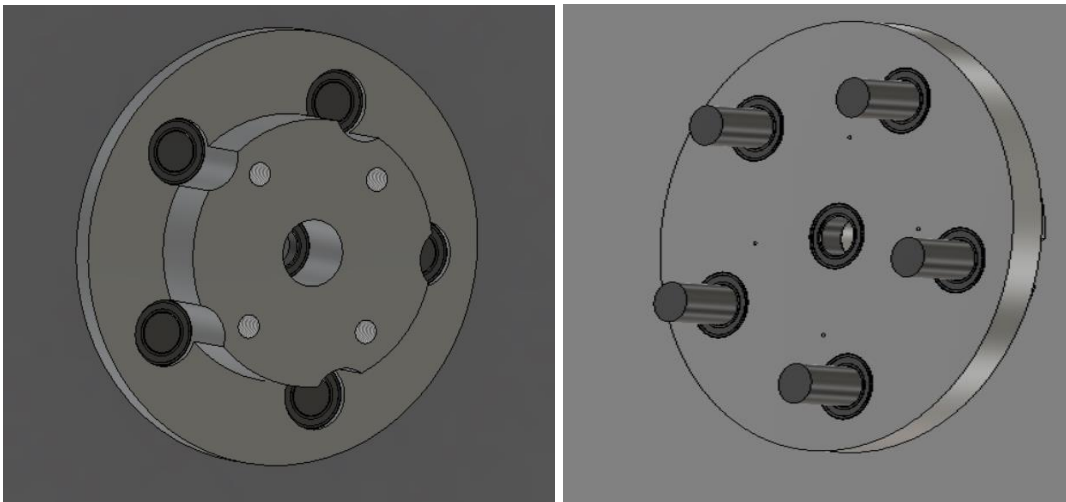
Top and Bottom Views of Output Disk for Cycloidal Gearbox
